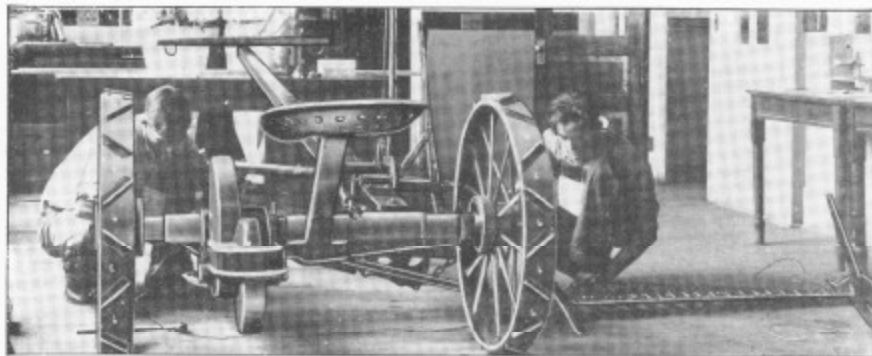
Boys in Farm Mechanics Class Overhauling a Mowing Machine.
